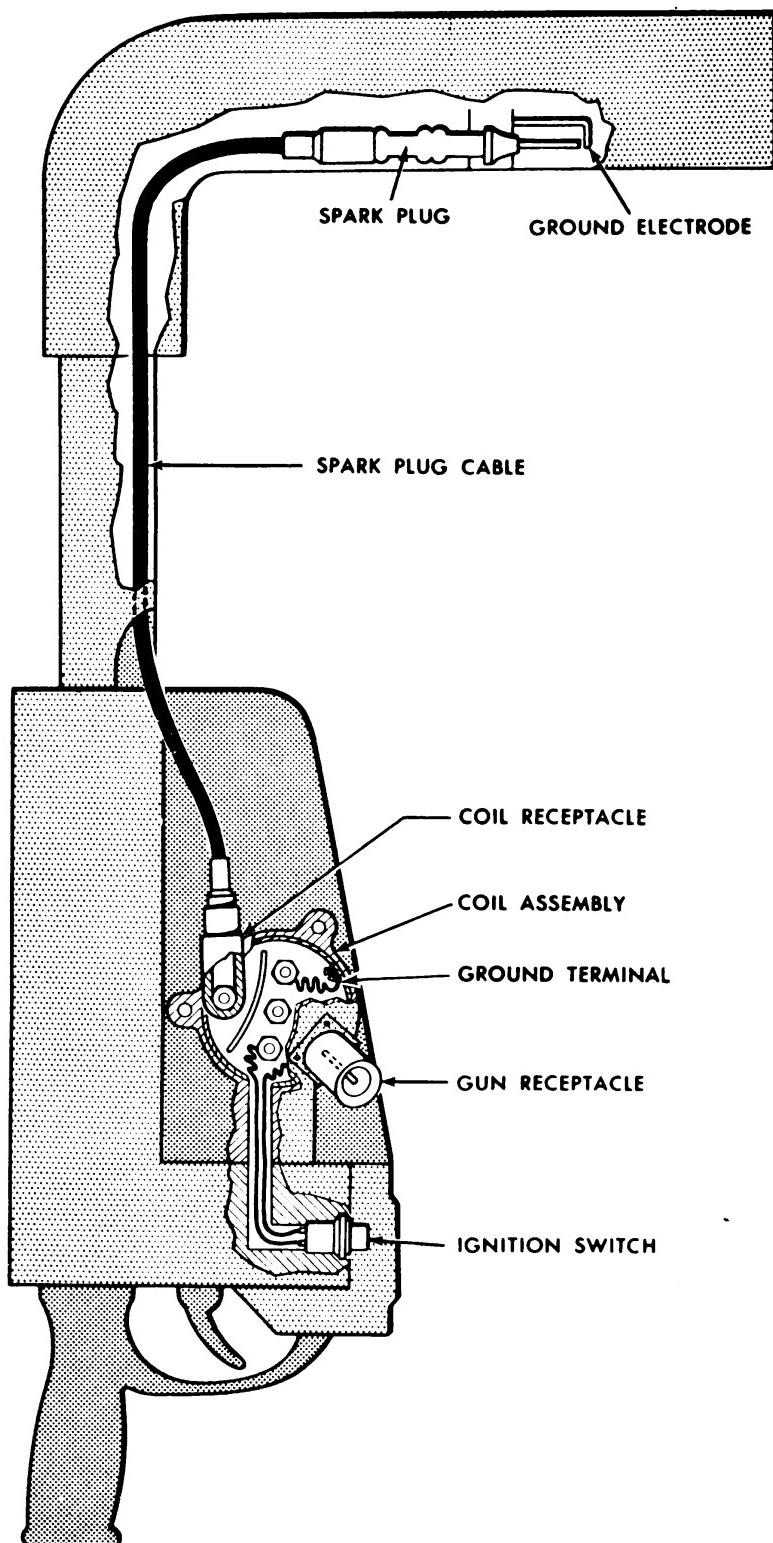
Flame gun electrical system showing relation of coil assembly to other parts of system.
